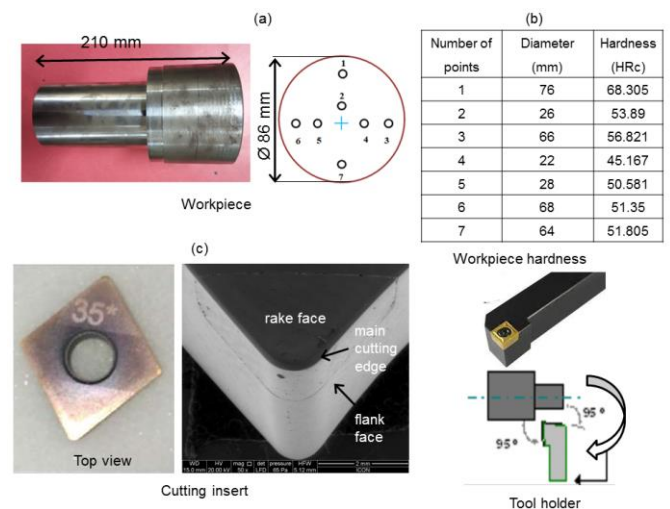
Pictorial view of (a) workpiece, (b) hardness of workpiece at a specified location, (c) SEM image of cutting insert, and (d) tool holder
